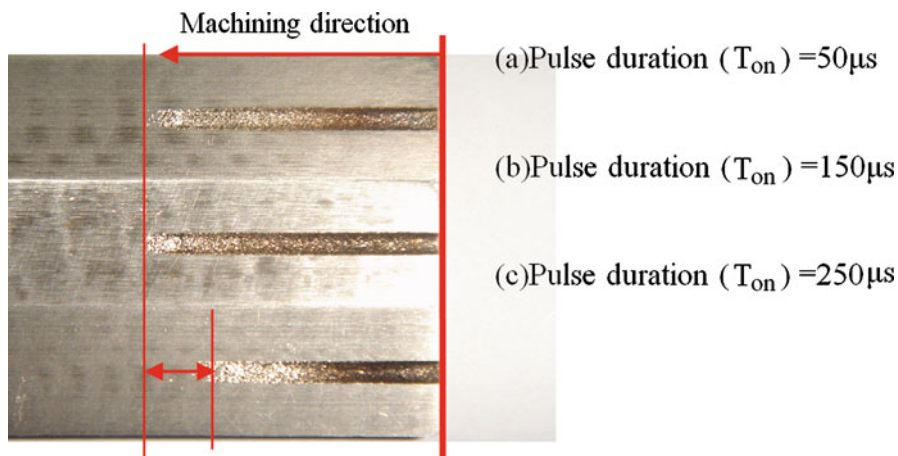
Machined length and its surface for different pulse durations (T_{on}) when peak current = 5A, machining depth (z) = 1 mm
